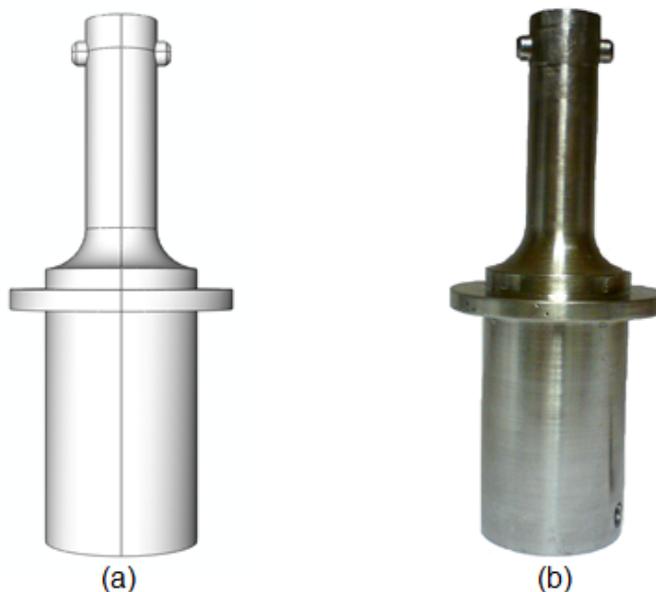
The spot welding horn (a) Modelled horn (b) Fabricated horn
